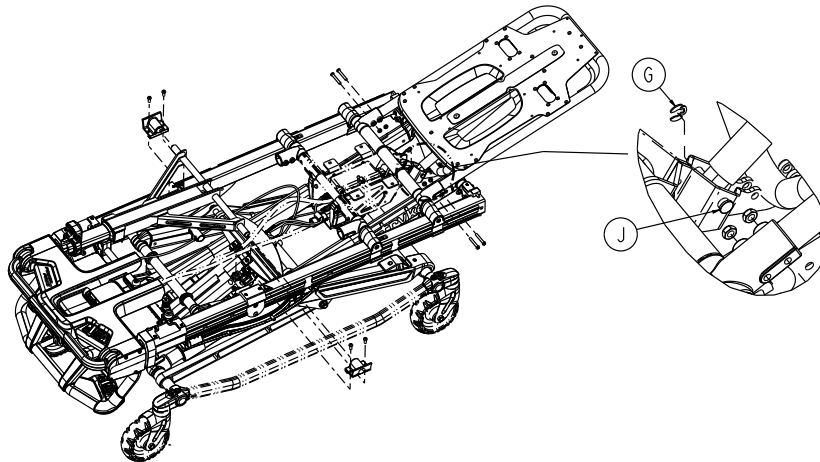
Remove the truarc ring and Fowler cylinder pin
